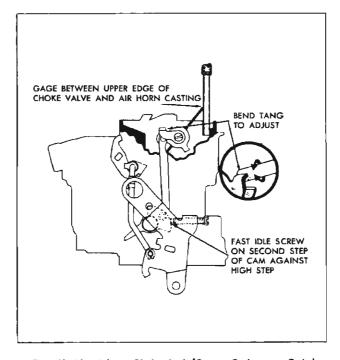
Adjust Choke Rod (Center Carburetor Only)
